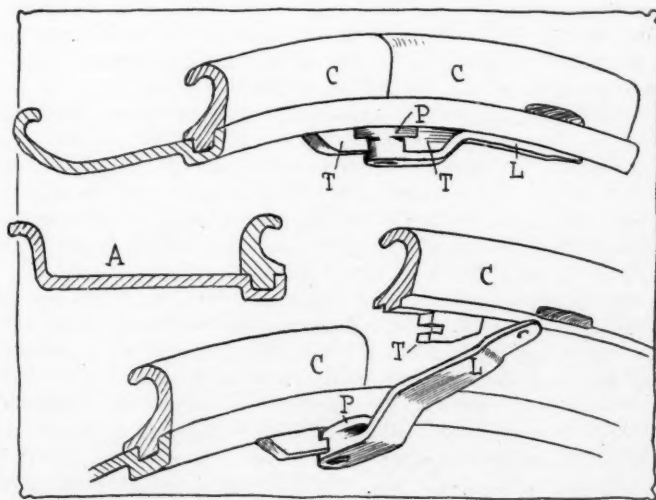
Details of Stanweld Q. D. rim for wire wheels
